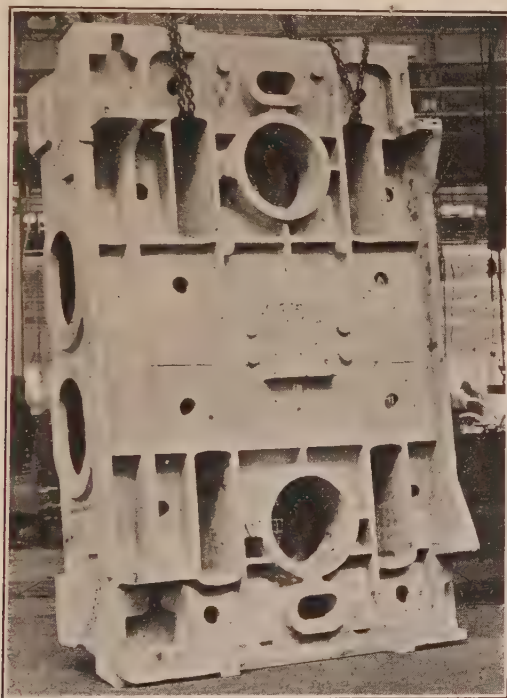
ALUMINUM ALLOY CASTING. DIESEL ENGINE BASE WEIGHING 3800 LB.
